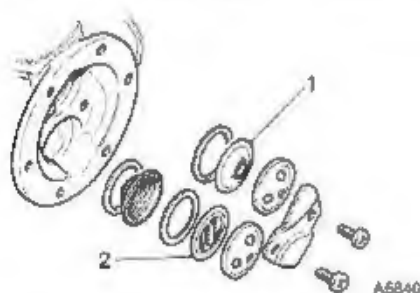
The valve assembly, type AUF300/AZX1300 pump.
